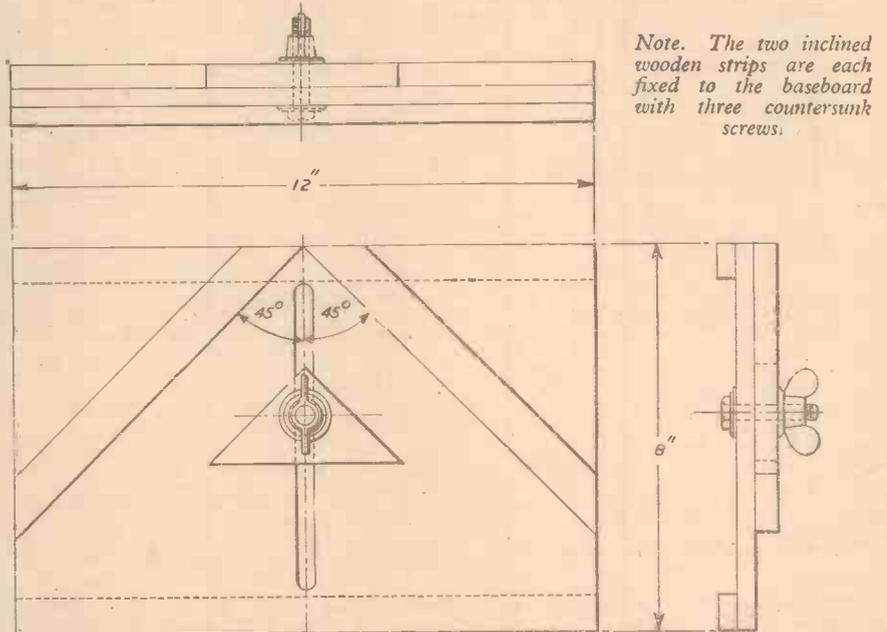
Plan and elevations of a clamp for holding the pieces of moulding while gluing.
